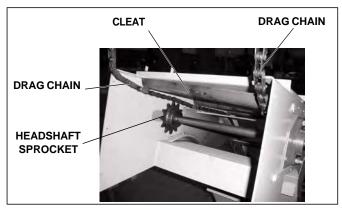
Feeding Drag Chain Assembly Into Discharge Opening (discharge hood removed)
